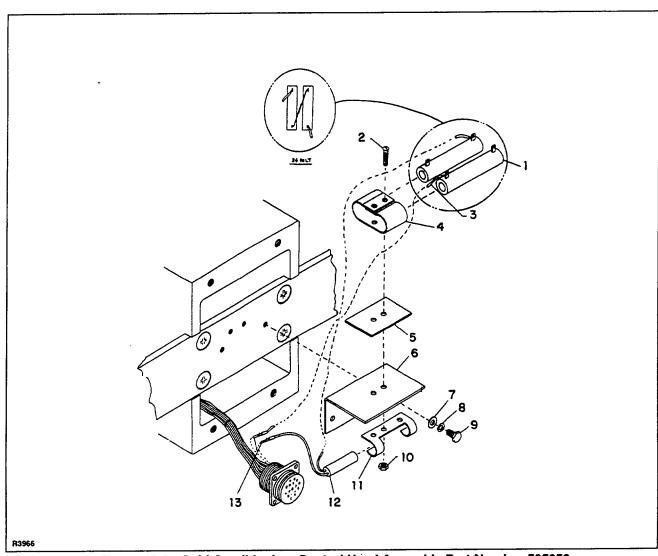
Cold Conditioning, Control Head Assembly Part Number 505050
